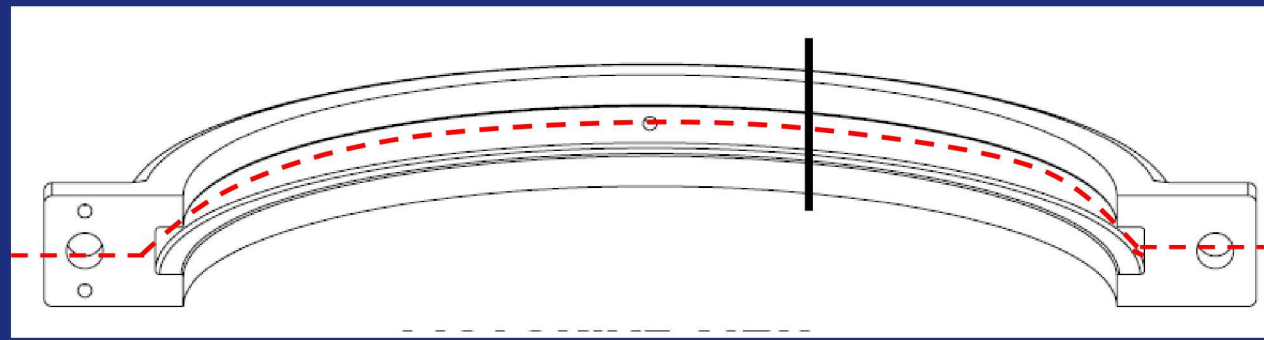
Drawing of containment ring – dotted line is approximate failure location
